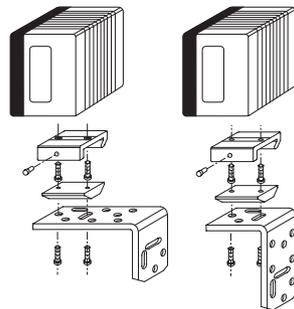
Example of mounting a CLV69x with a quick clamping device and a mounting bracket
